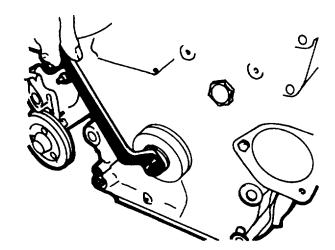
Pressing on Radial Seal Ring with Fitting Device
